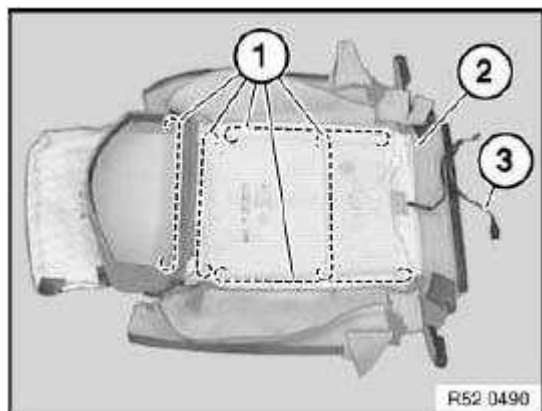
Trim Threads, Seat Cover And Heater Cable
